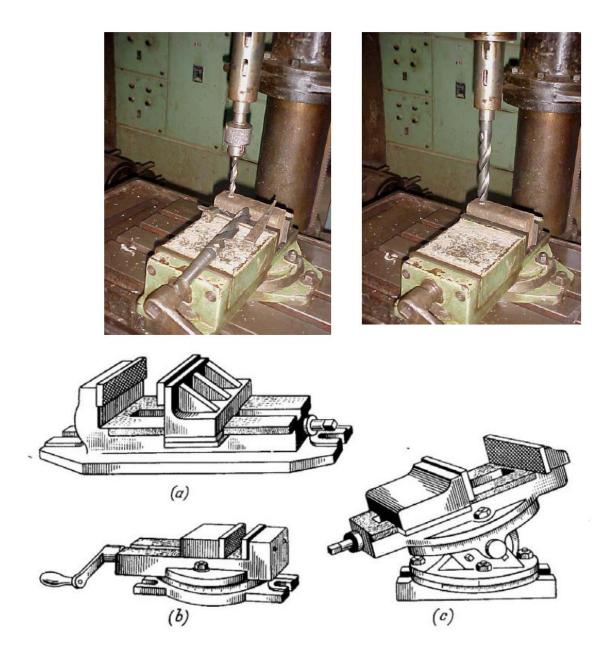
(b) Vices to hold jobs in drilling machines Direct clamping of job or clamping of the vice and jig on the drilling bed are done with the help of clamp plates, T-bolts etc., as indicated in Fig. 4.5.16. Fig. 4.5.15 (b) shows the type of vices; plain, swivelling and universal type being used for holding small jobs in drilling machines. Fig. 4.5.16 also typically shows how a job is fitted in a iid for drilling in batch production
